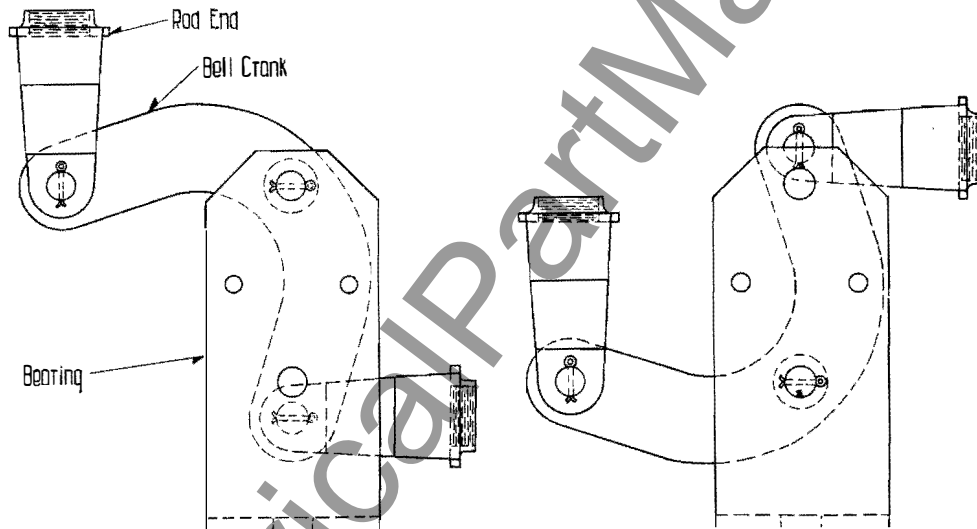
BELL CRANK SHOWING ASSEMBLIES FOR ABOVE AND BELOW FLOOR MOUNTING
